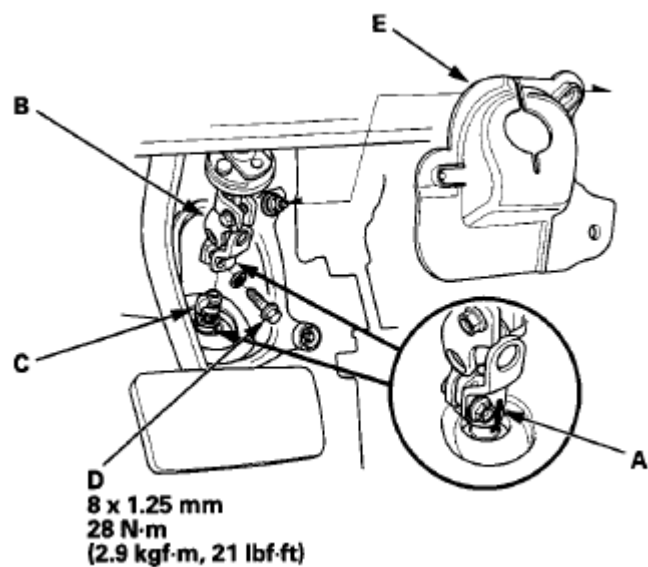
Aligning Reference Mark On Steering Joint And Steering Gearbox Pinion Shaft With Torque Specifications
